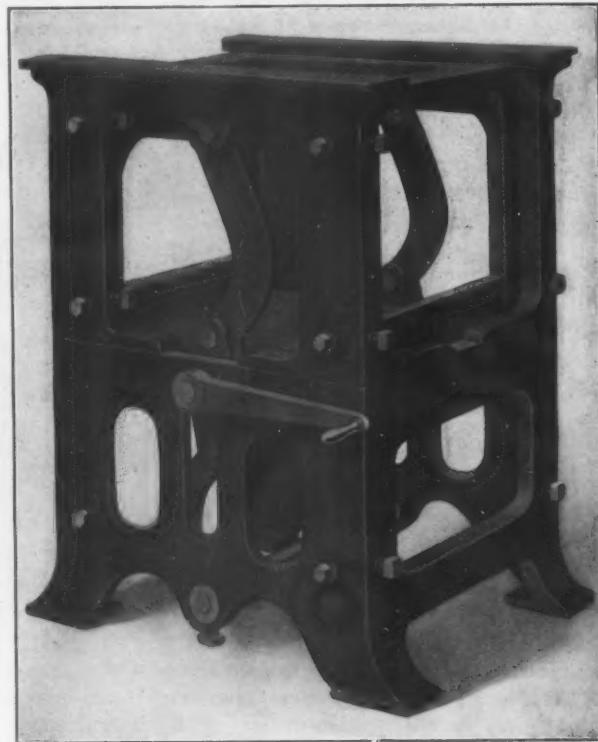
A Special 10 1/2-In. Draft Osborn Flask-Stripping Molding Machine.
